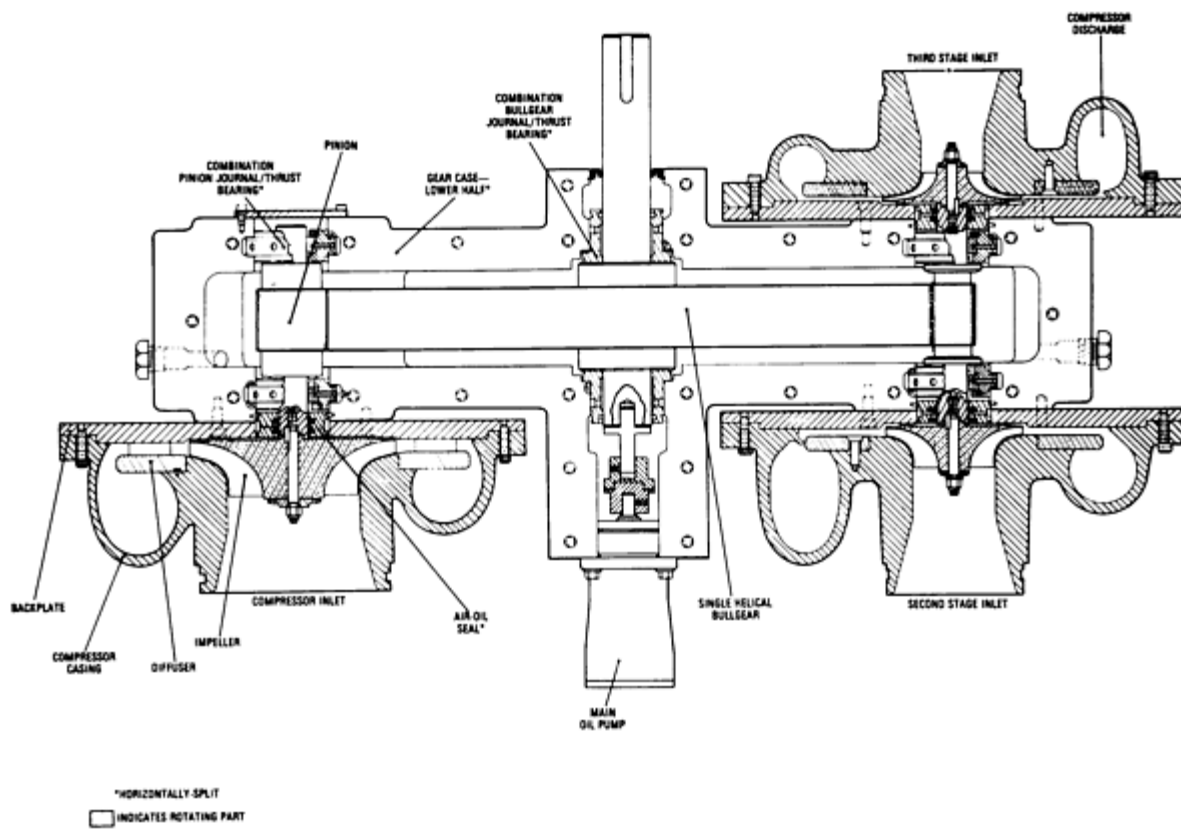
Cross section of integrally geared centrifugal compressor. Courtesy of Elliott Company
